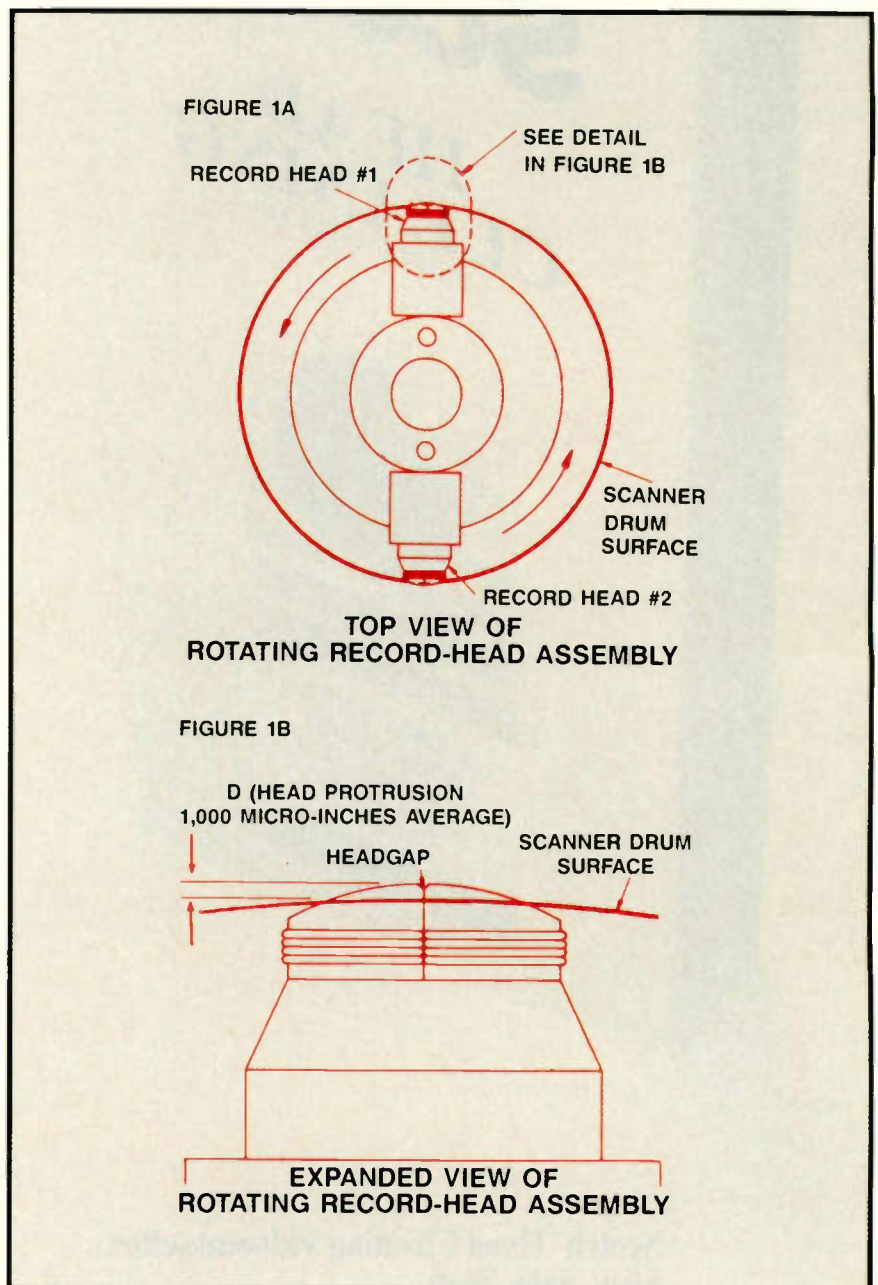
The video heads are mounted in a rotating drum assembly. The heads protrude slightly from the drum, which allows them to push into the tape coating. This design provides the extremely intimate contact between head and tape that is essential to record and resolve the high-frequency video information.
